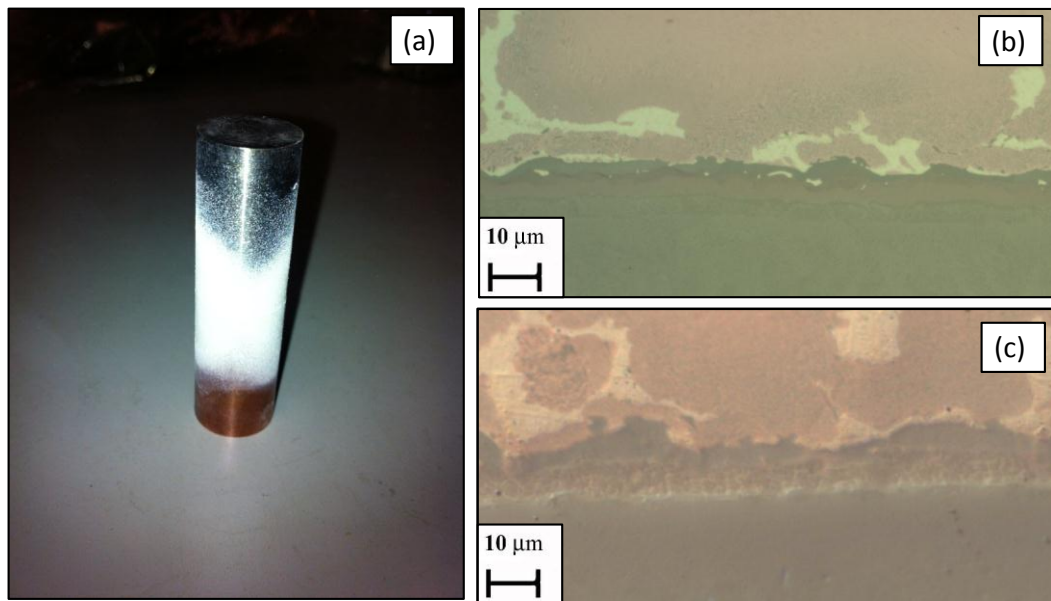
Microcracking investigation: (a) dye penetrant testing (b) optical inspection of braze before thermal autofrettage and (c) after thermal autofrettage.
